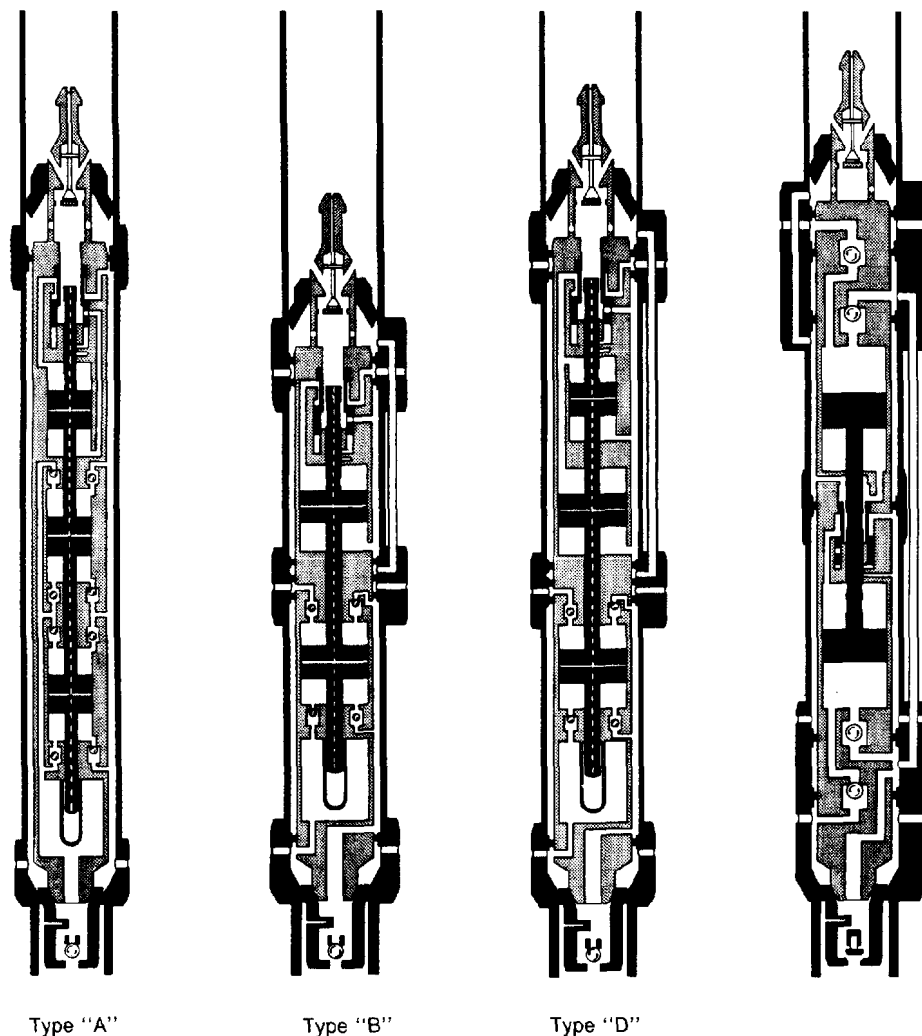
Manufacturer "B" pump types for Table 6.2.
